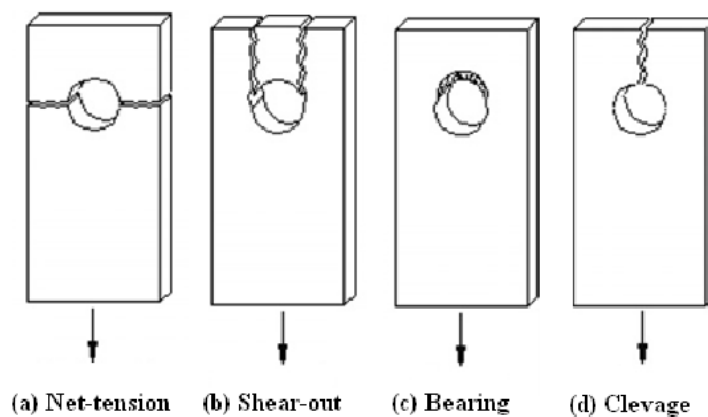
Modes of failure in bolted composite parts under tension [12]
